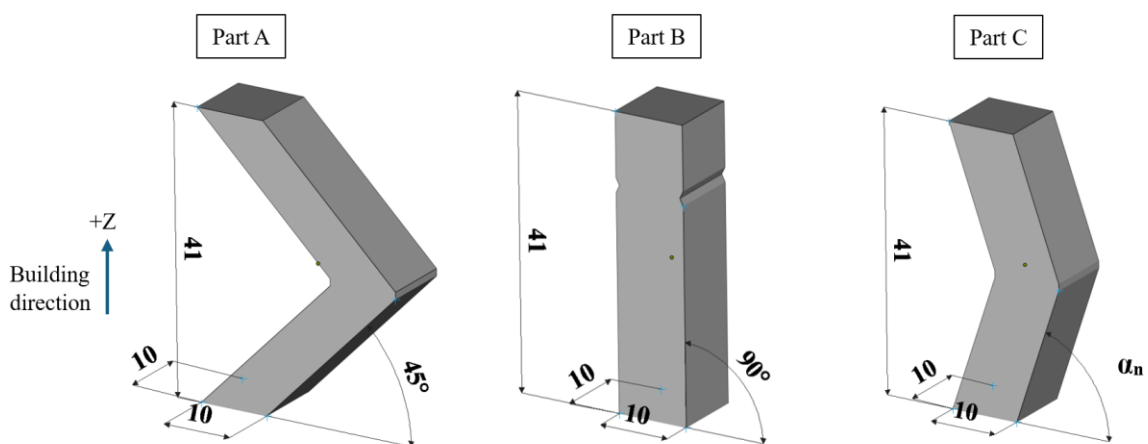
Test parts that were used for investigating the surface roughness (dimensions are in mm, not to scale).
